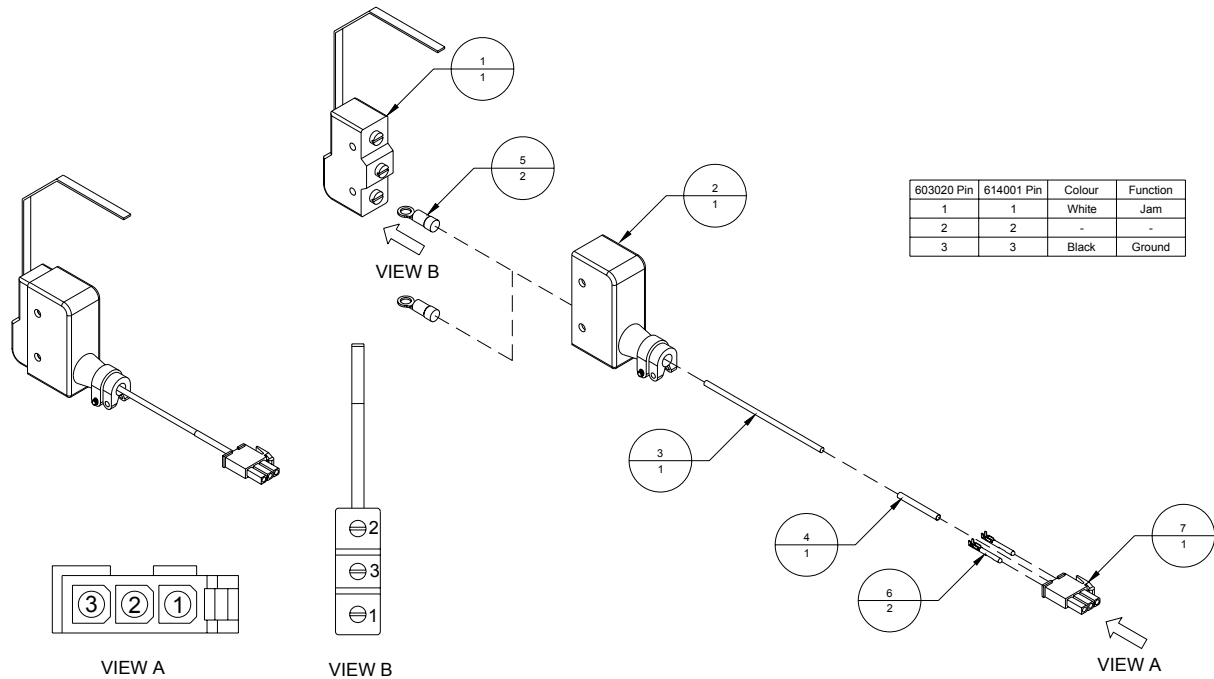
Jam Stop Switch Assembly (603020A)
